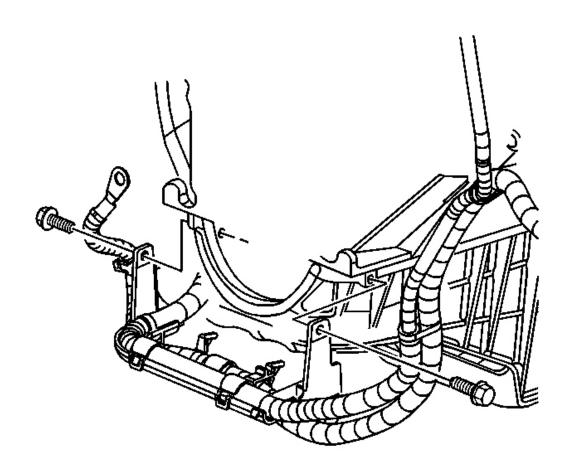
View Of Battery Cable Bracket Bolts Courtesy of GENERAL MOTORS CORP.
